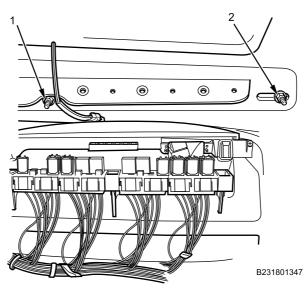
Cross-Vehicle Equipment Bracket Nut Right Side Interior Locations.
